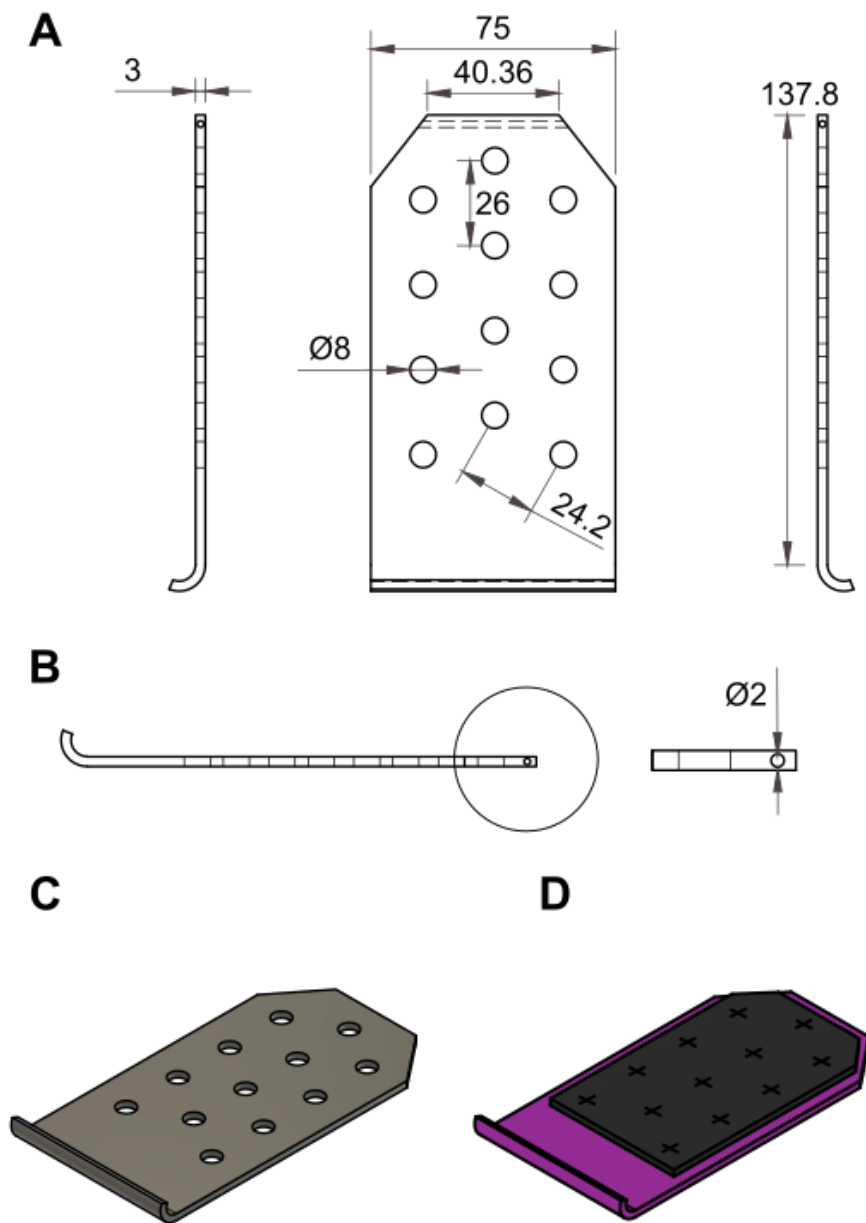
Design schematics of the Depositor to help with the initial deposition of cohorts within the MultiFlipper. (A) Schematics showing key measurements (mm) of slider. Designed in Fusion³⁶⁰ software. (B) Side view of Depositor showing hole for ferrous metal nail. (C) side angle view of slider, and (D) side angle view of a Depositor with *post* print modification.
